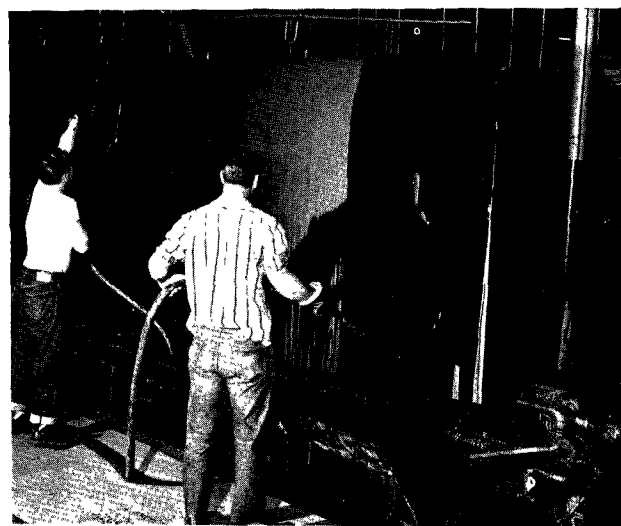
An 18- by 6-foot, stainless steel sheet being masked by flow-coating with a rubber-based masking (U.S. Chemical Milling Corp., Manhattan Beach, Calif.).
